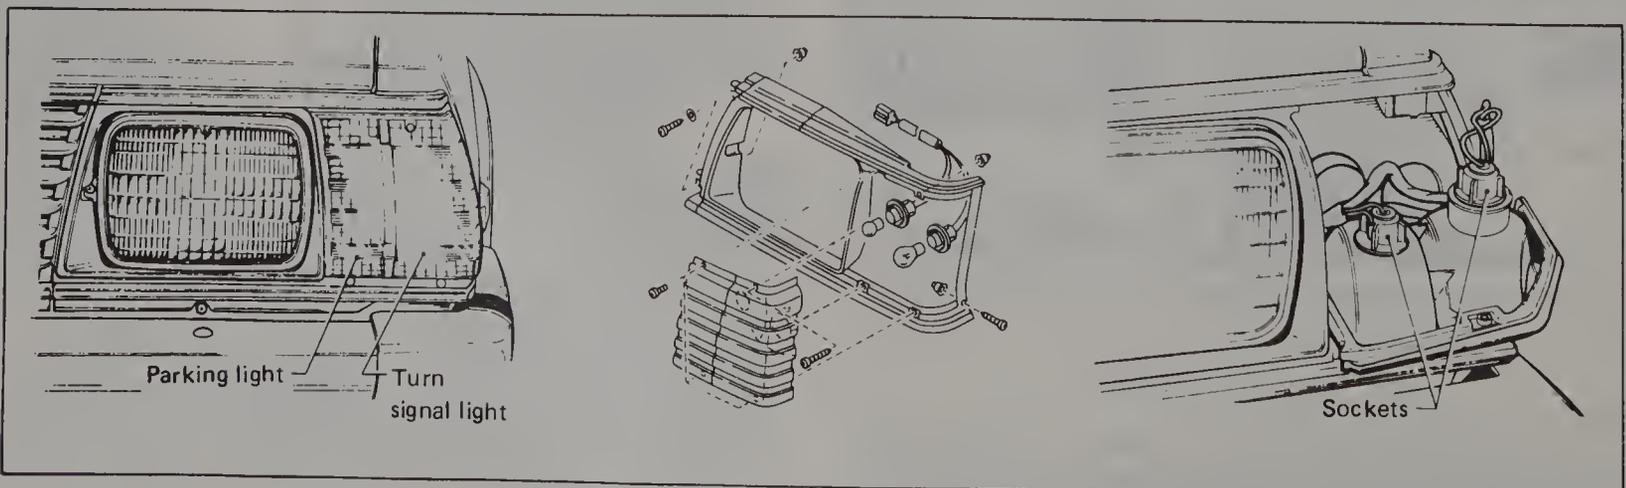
Typical front combination light components – exploded view (Sec 11)
